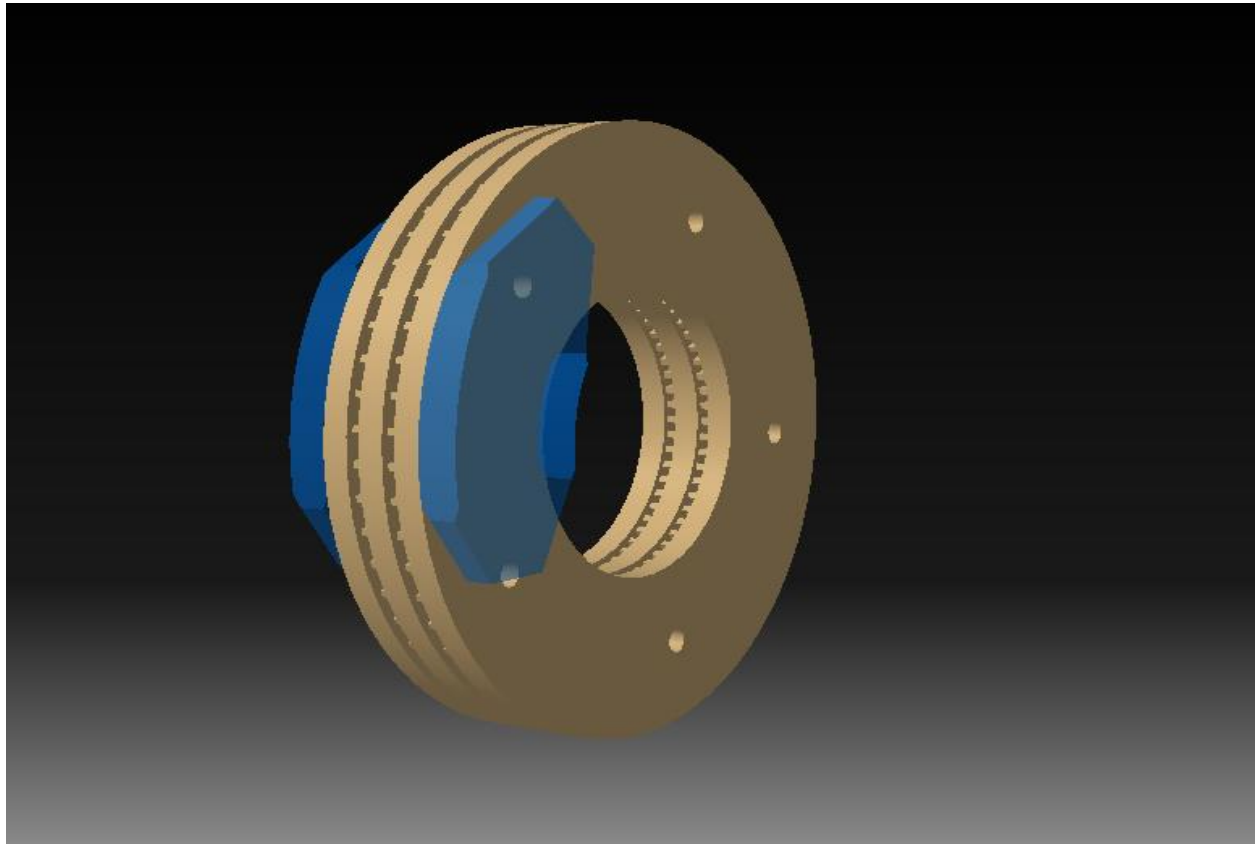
3D Geometry of the Disc/Pad assembly in CATIA.
